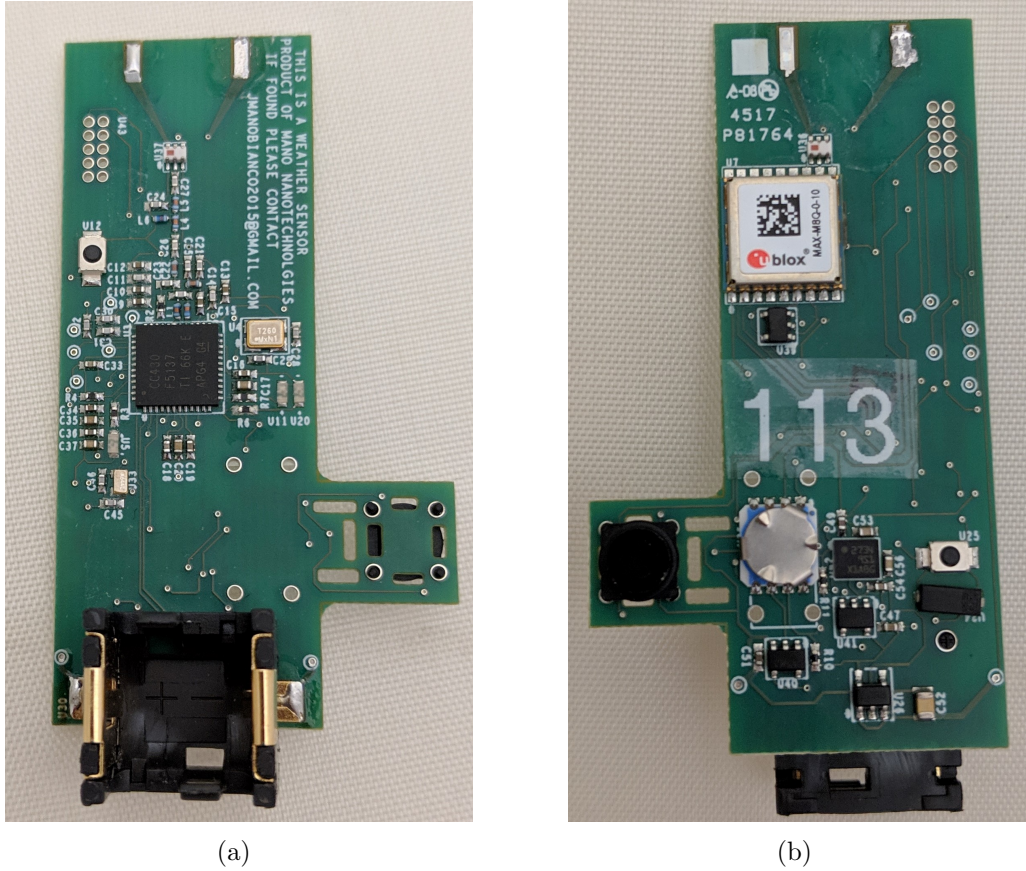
eMote Revised PCB Design (a) Front Side and (b) Back Side
